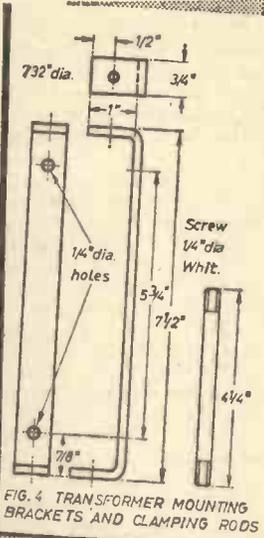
TRANSFORMER MOUNTING BRACKETS AND CLAMPING RODS
